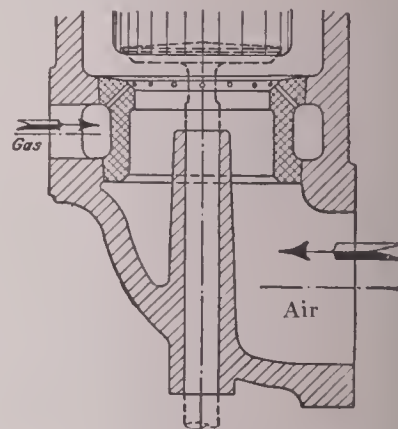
Inlet and Mixing Valve for Small Engines.
